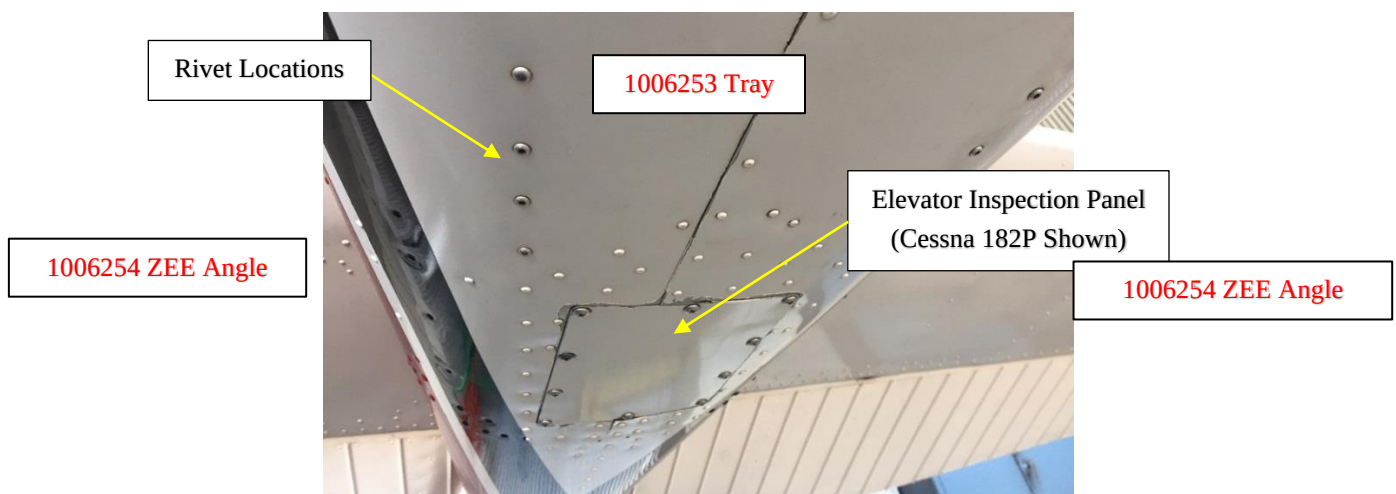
ACCESS PANEL SCREWS AND ZEE ANGLE RIVET LOCATIONS
